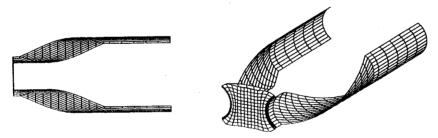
The copper pieces are formed into a "U" shaped double 1800 helix which will conform to the bores of the core.
